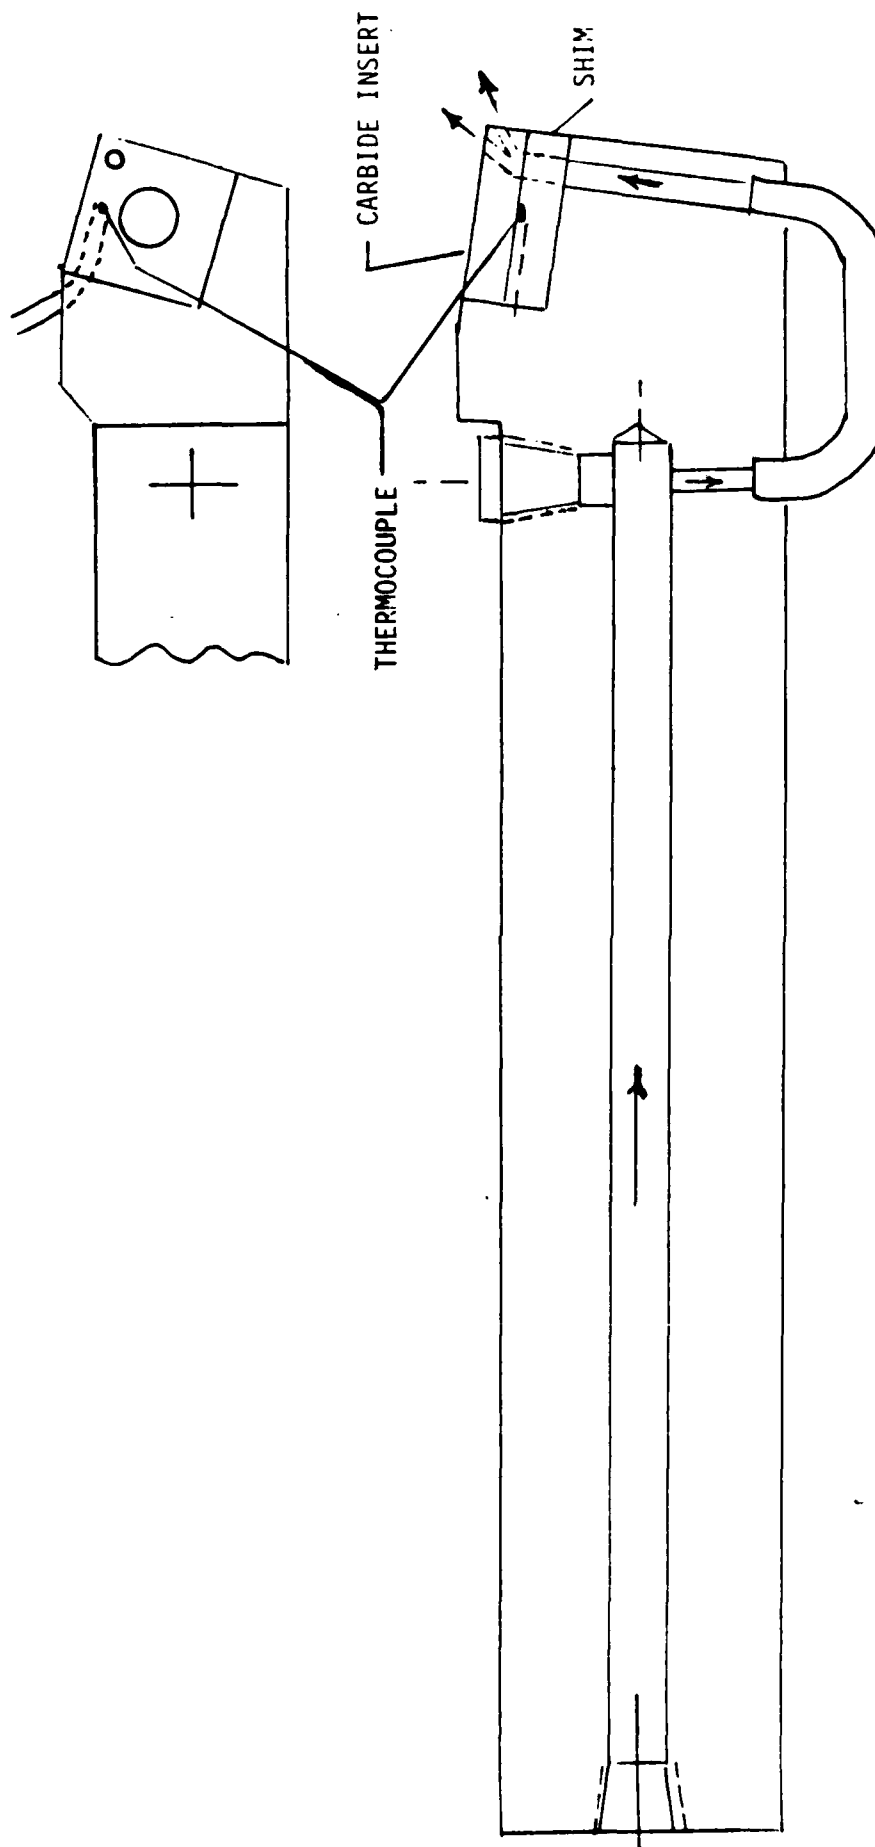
LATHE & PERIPHERAL EQUIPMENT
